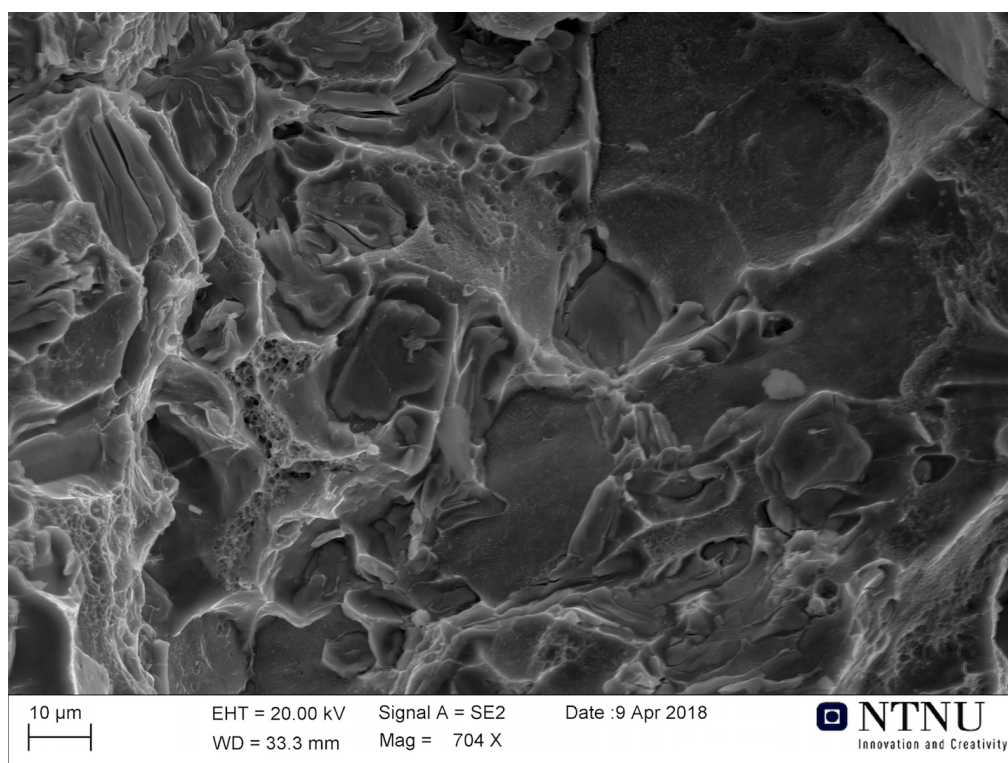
Pictures of the fracture surface of the smooth and *V*-notched specimen.
